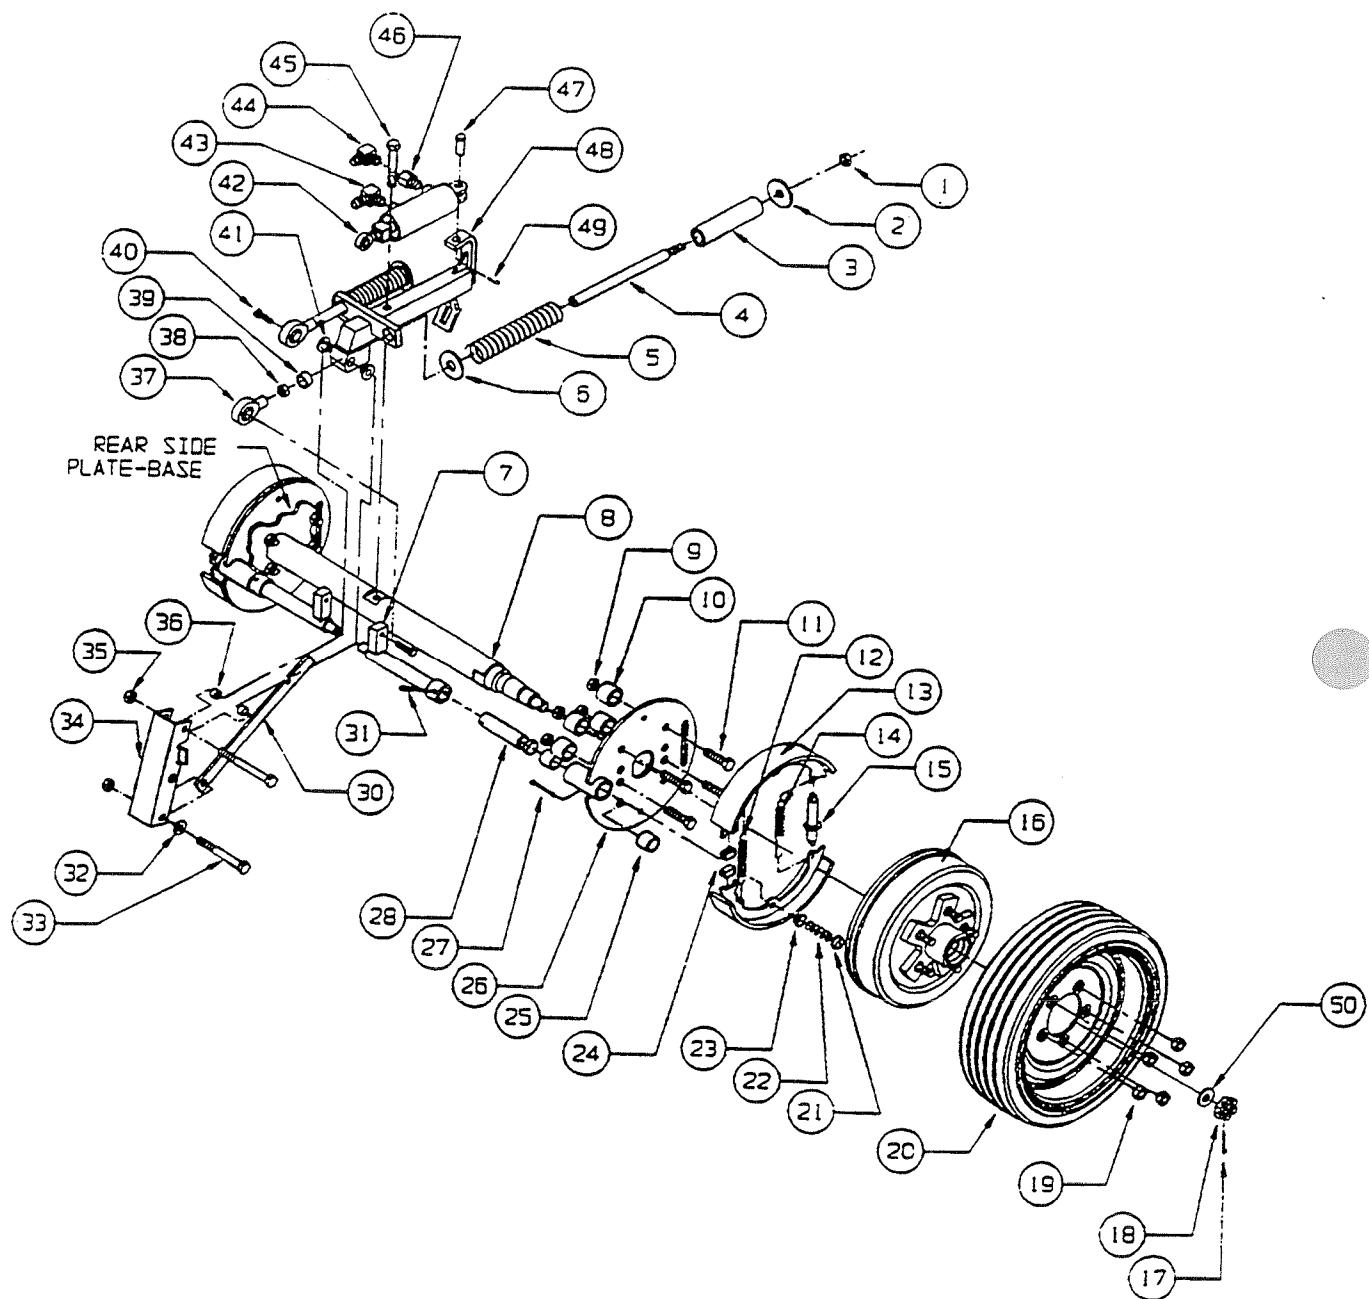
2033ES Rear Axle and Brake Assembly
